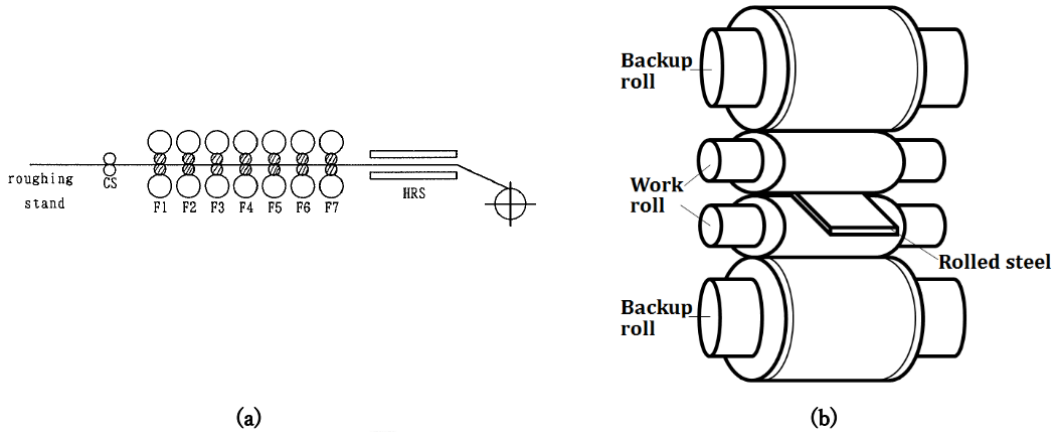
(a) Hot strip mill finishing train; (b) Four-High rolling mill model
